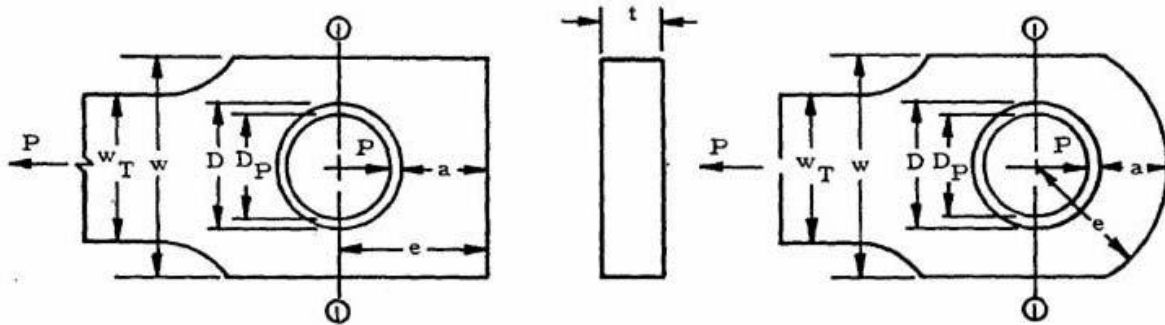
Lug Geometry for Uniform Axial Loading [5]
